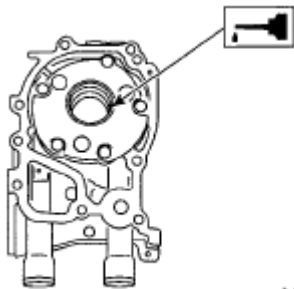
Applying Thin Coat Of Engine Oil To Inside Of Front Oil Seal
